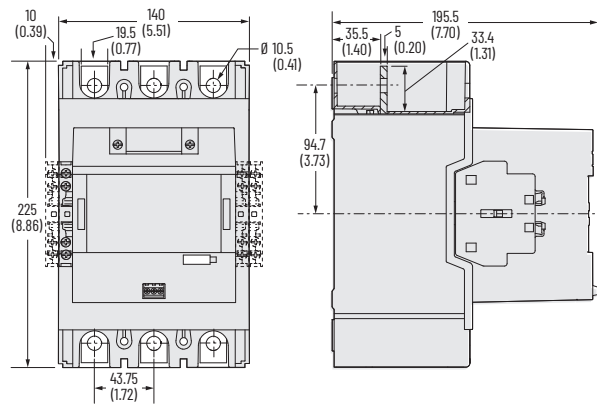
104-E190, 104-E205 Reversing Contactors with Cat. No. 100-EM... Mechanical Interlock
